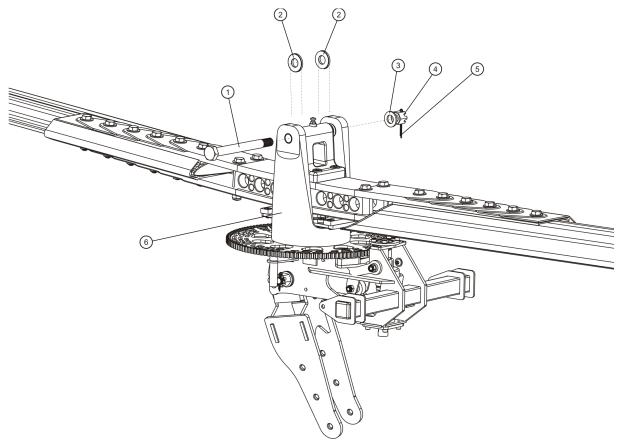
Removal rotor - teetering parts (Effectivity: RS II)
